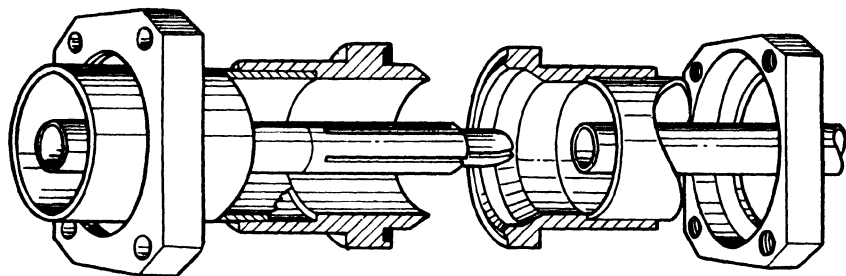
Connector for $\frac{7}{8}$ -in. coaxial line.
